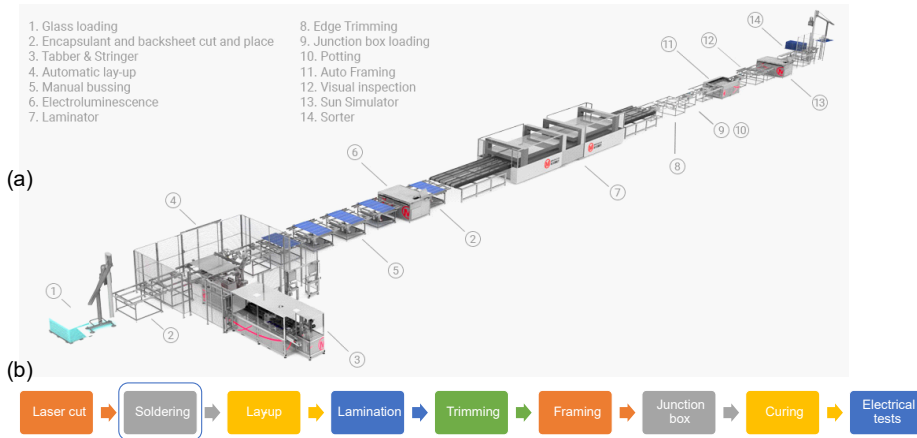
Module process flow. (a) Layout of an industrial solar module production. Courtesy of Mondragon Assembly [131]. (b) Schematic of the ribbon connected back contact module manufacturing flow.
